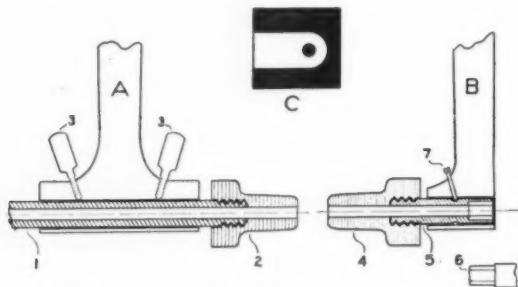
Sections showing construction details of the arms carrying the ear posts: *A*.—End of arm nearest x-ray tube; 1, steel tube; 2, fiber ear post; 3, set screws. *B*.—End of arm nearest cassette; 4, fiber ear post; 5, short steel tube; 6, end of key; 7, set screw. Section *C*.—Light area represents superimposed shadows of *A* and *B* on x-ray film with round black spot, the area exposed by rays passing through the lumens of 1 and 5.
